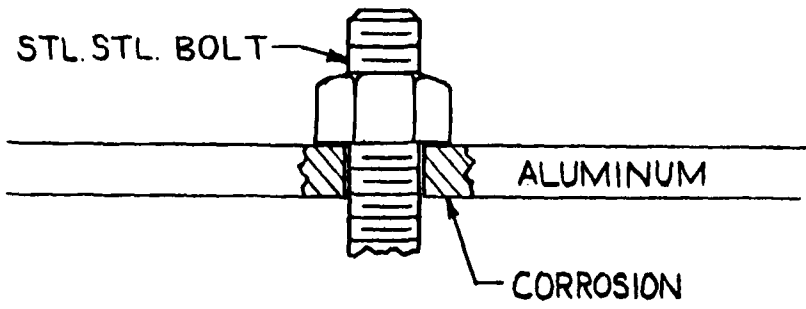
Corrosion enlarges aluminum bolt hole (Marine atmosphere)
